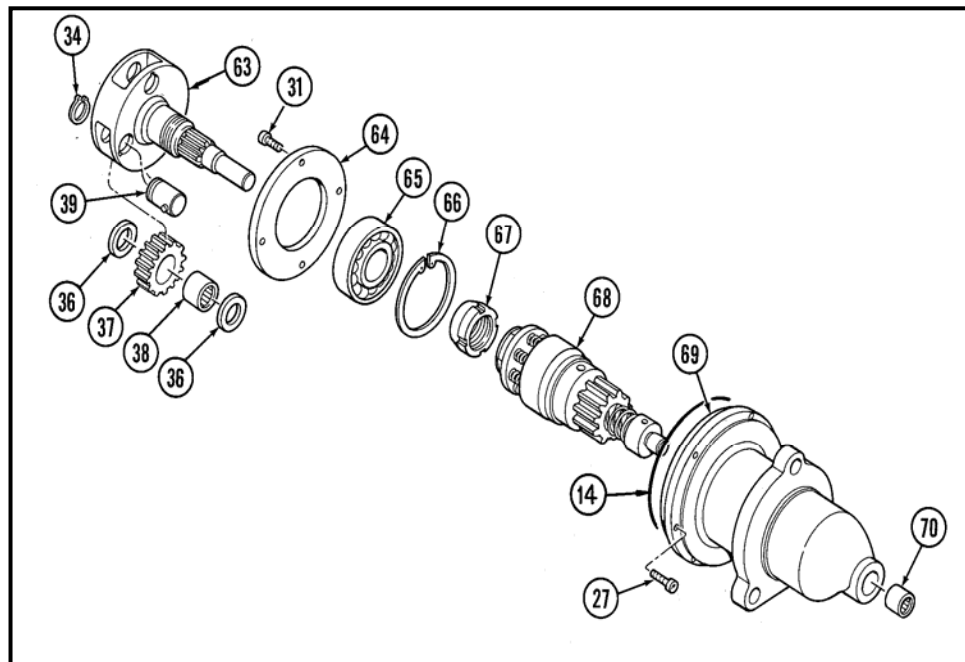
Gearbox/Bendix Assembly (T106F/T112F)
